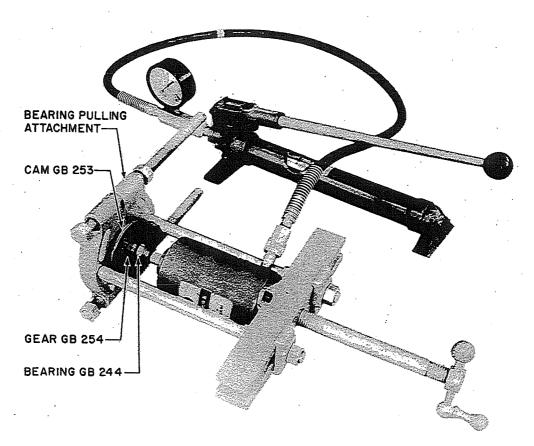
Detector, Removal of Bearing GB244, Gear GB254, and Cam GB253
